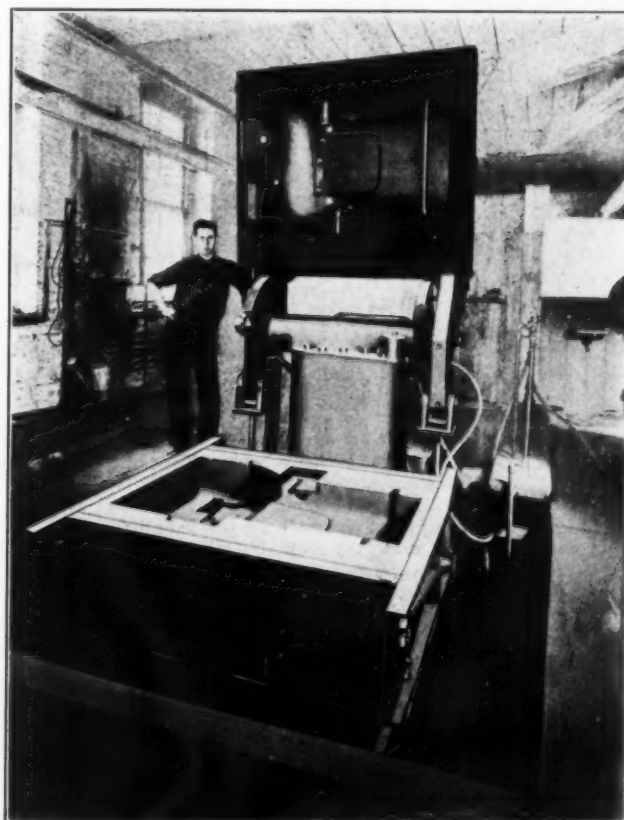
Grinder Frame Mold made on the Machine shown in Fig. 10.
